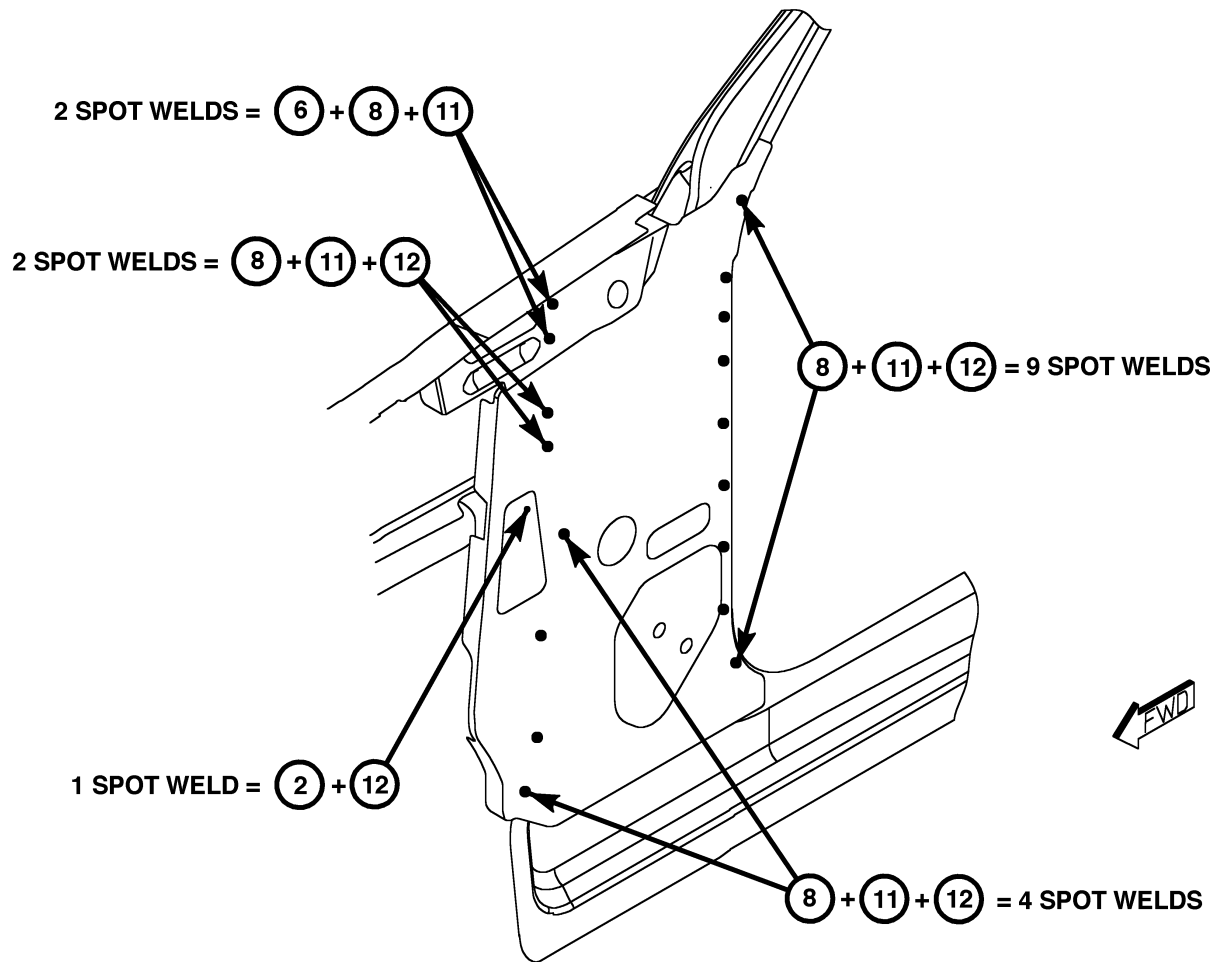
PLENUM ASSEMBLY AND INNER SIDE PANELS
